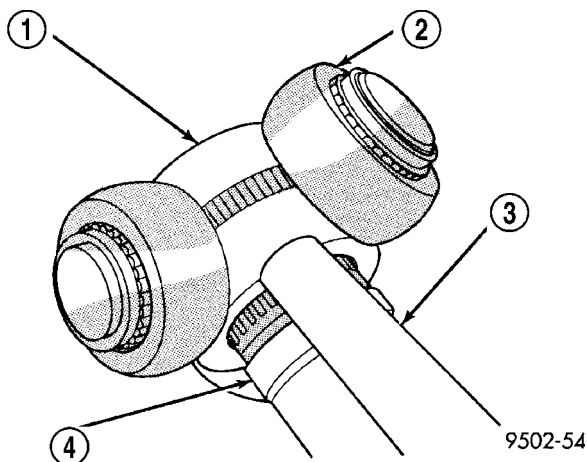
Spider Assembly Removal from Interconnecting Shaft
